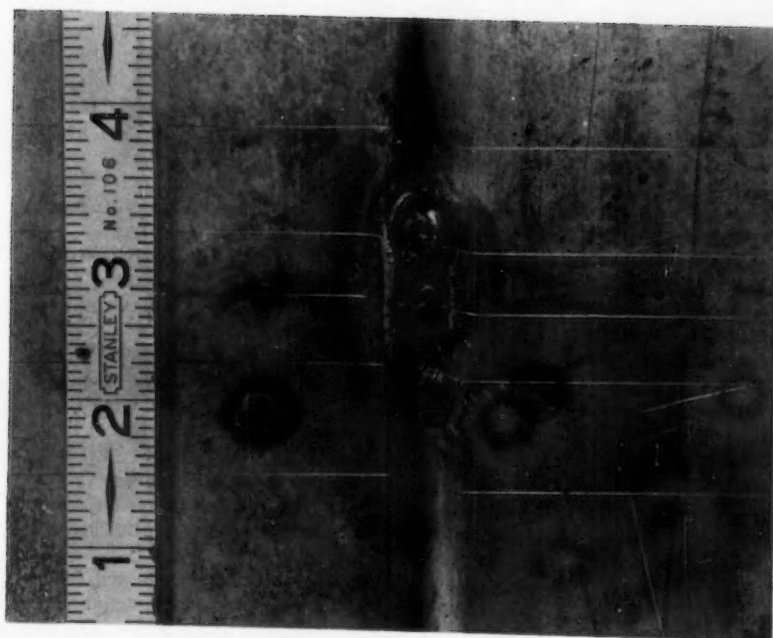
DETAIL OF FILLET-TYPE SEAM WELDS
